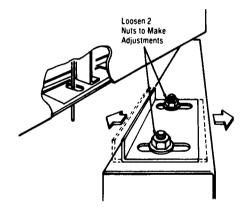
DOOR SWITCH ADJUSTMENT.
